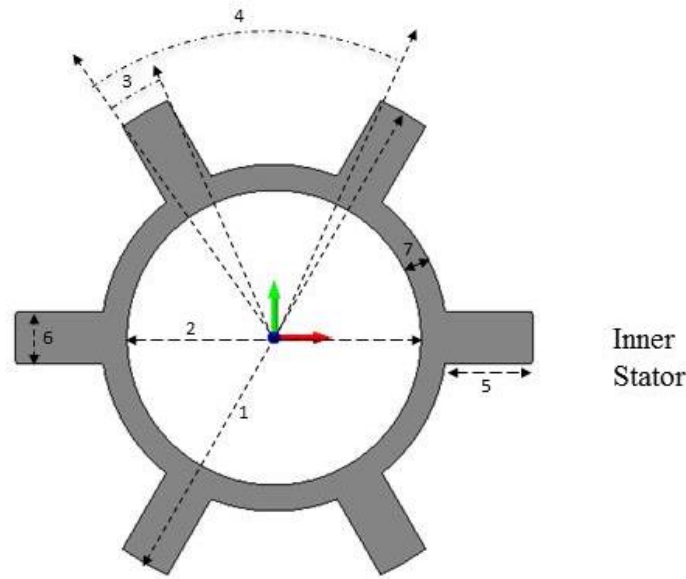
Inner Stator Dimensions of The STPM Machine.
